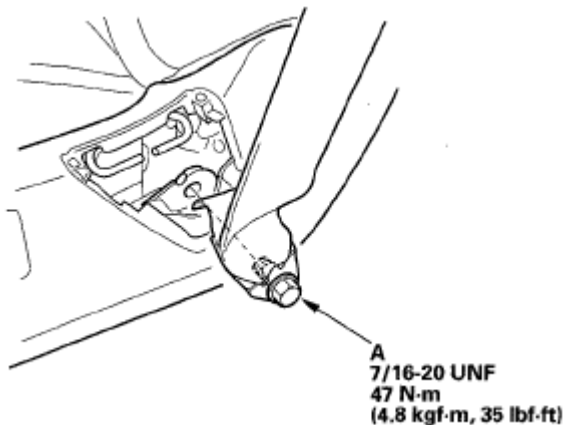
Identifying Lower Anchor Bolt Tightening Torque
